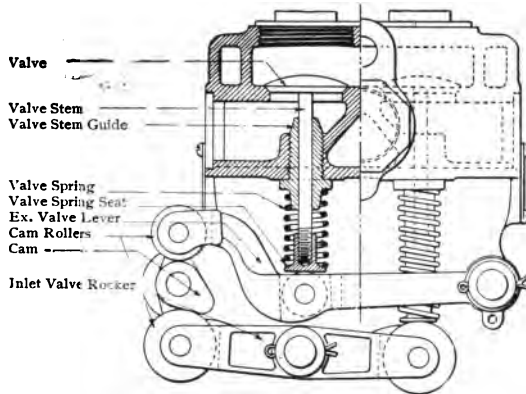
SINGLE CYLINDER VALVE PARTS.
